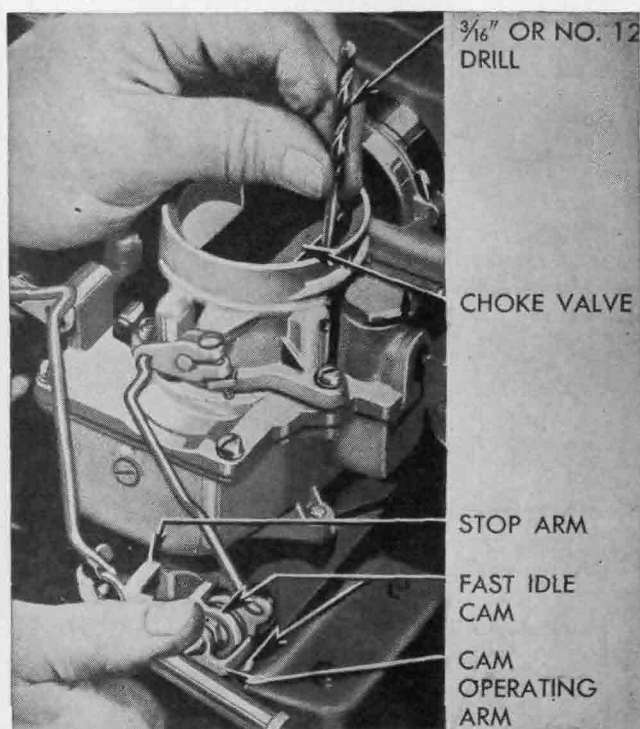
Checking choke unloader adjustment. (Buick Motor Division of General Motors Corporation)
